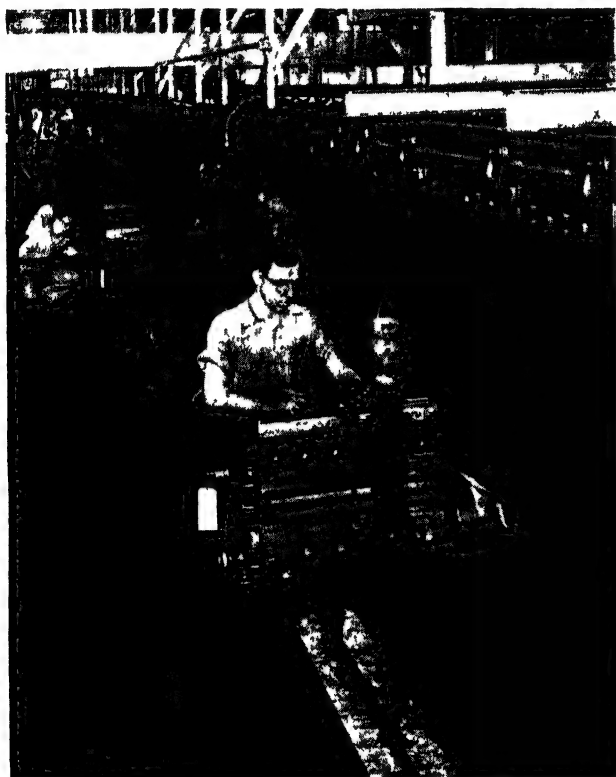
Another type of conveyor used in engine assembly. Note the guide for the lower end of the engine stand.
